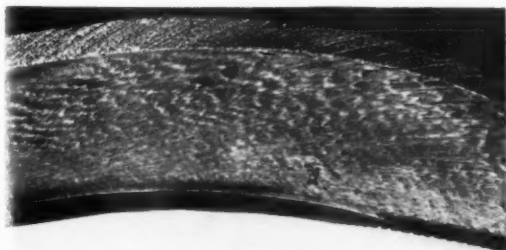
Failed pinion gear tooth surface due to rippling — High Torque-Low Speed Axle Test.
